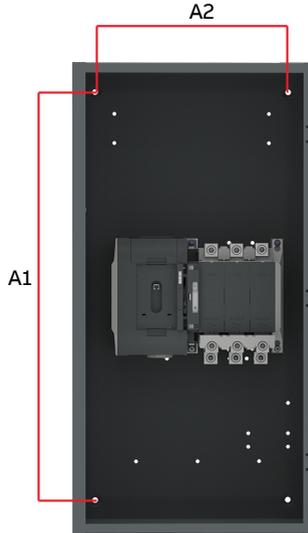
Automatic transfer switches, Mounting hole dimensions, refer to Table 9.2 for A1 and A2 values
